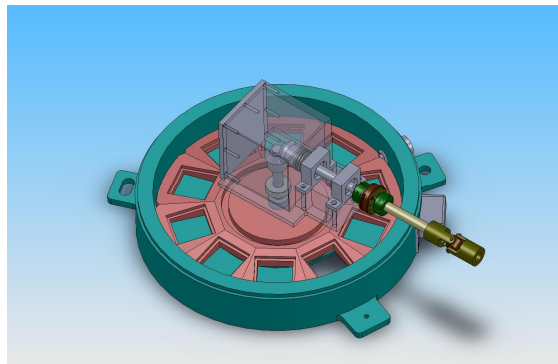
Mechanical model of the slit selector assembly, covers removed.
